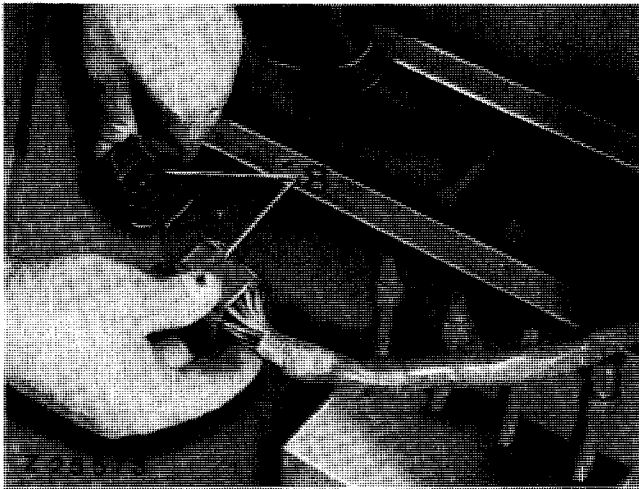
Wiring Harness Plug next to Operator's Seat (Seat Removed)
